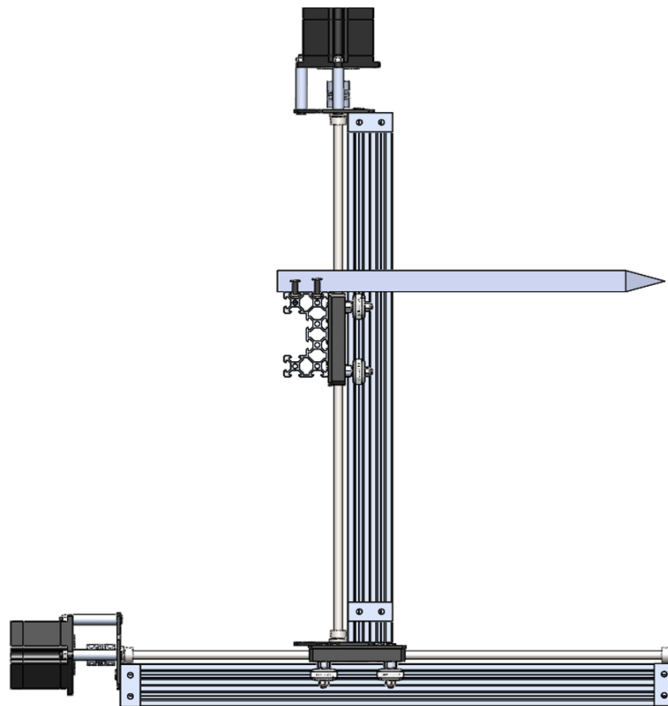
Initial Solidworks design model of subsystem 2: antenna mount assembly.
